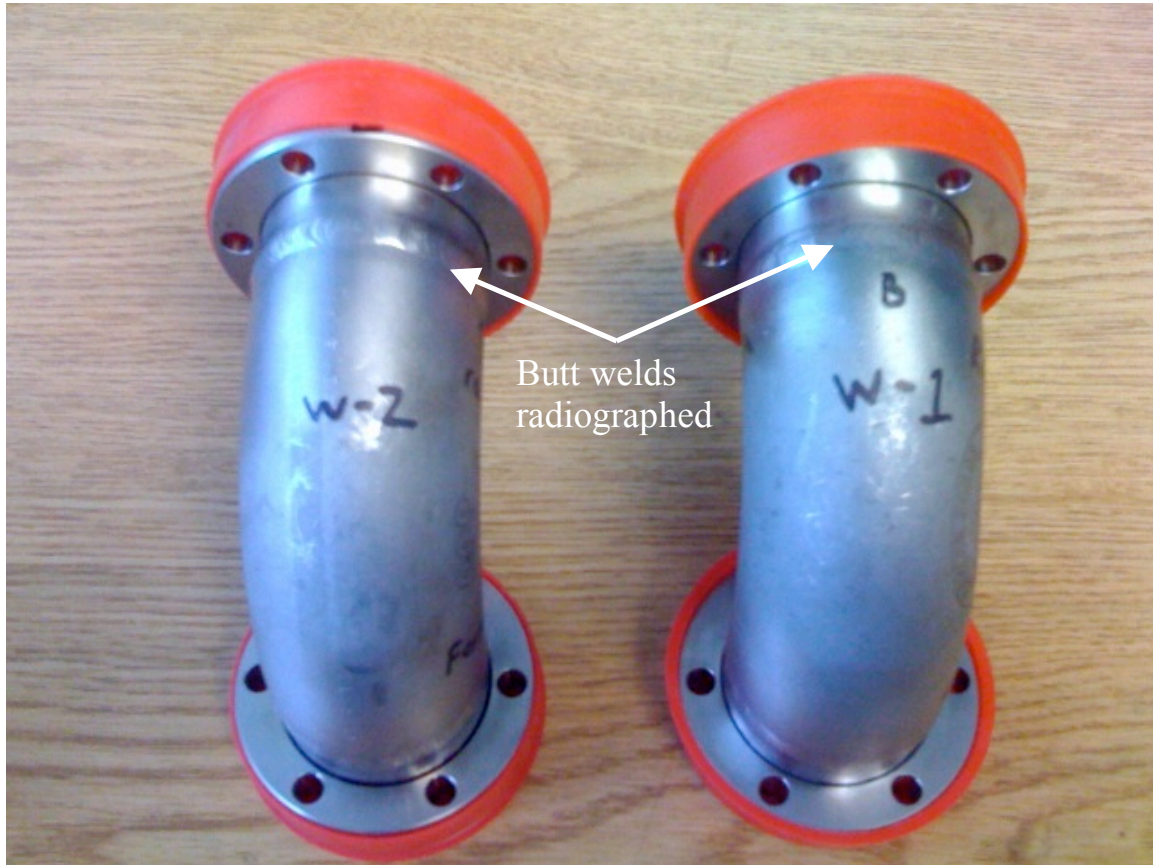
“Bo” relief valve supply elbows sent out for radiography.
